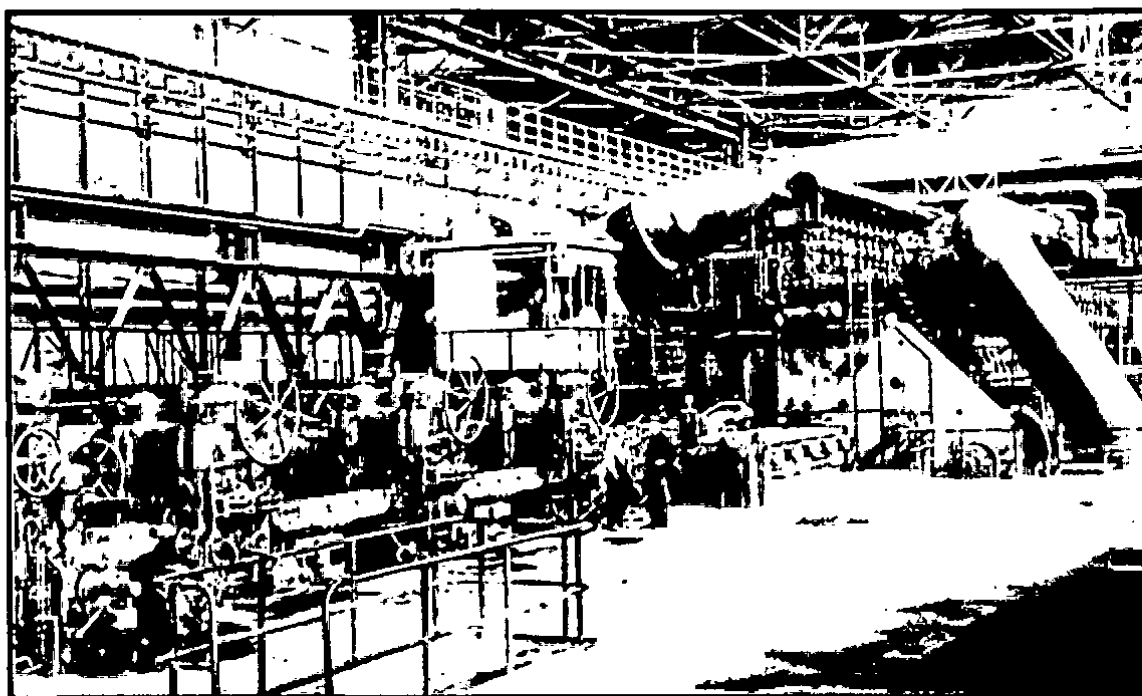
A 300-mm Bar Mill in the Rolling Mill Division of the
